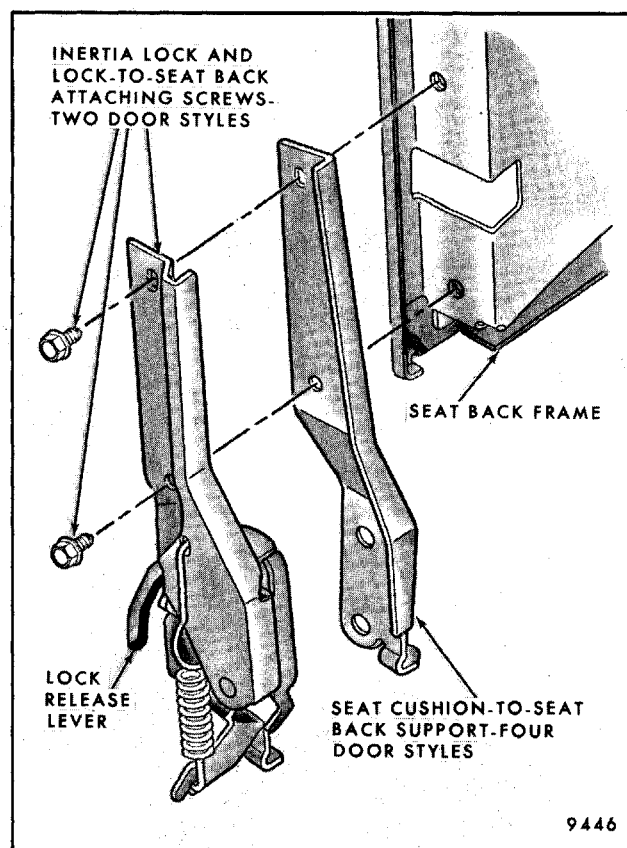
Front Seat Back Inertia Lock - "B and C" Body Two-Door Styles
